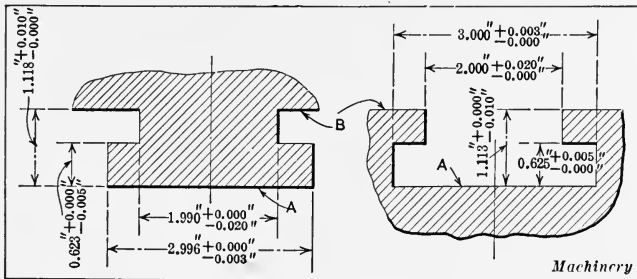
Proper Dimensioning of Slide shown in Fig. 8
